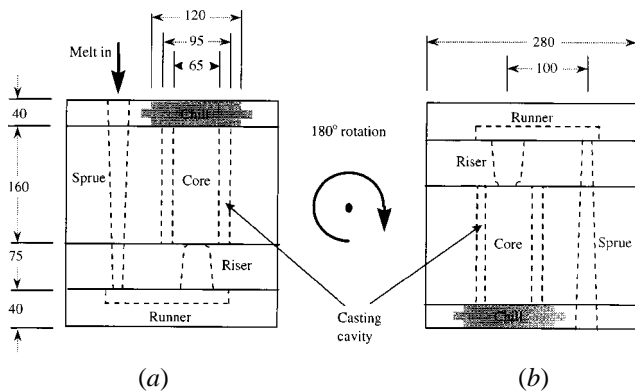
The ILP mold assembly used for producing the cylindrical test castings, showing (a) the pouring mode orientation and (b) the inverted solidification mode orientation. The key dimensions of the assembly and casting are expressed in millimeters. The sand block dimension into the page is approximately 305 mm. The riser diameter varies from 45 to 50 mm along its length. The chill has a locating rim of  $10 \times 15$ -mm cross section and has a rebate 20-mm deep (not shown) to locate the central sand core. The whole assembly is clamped together in an invertible cradle (not shown). The clockwise inversion, as shown above, results in the loss of molten metal from the sprue and runner system only.
